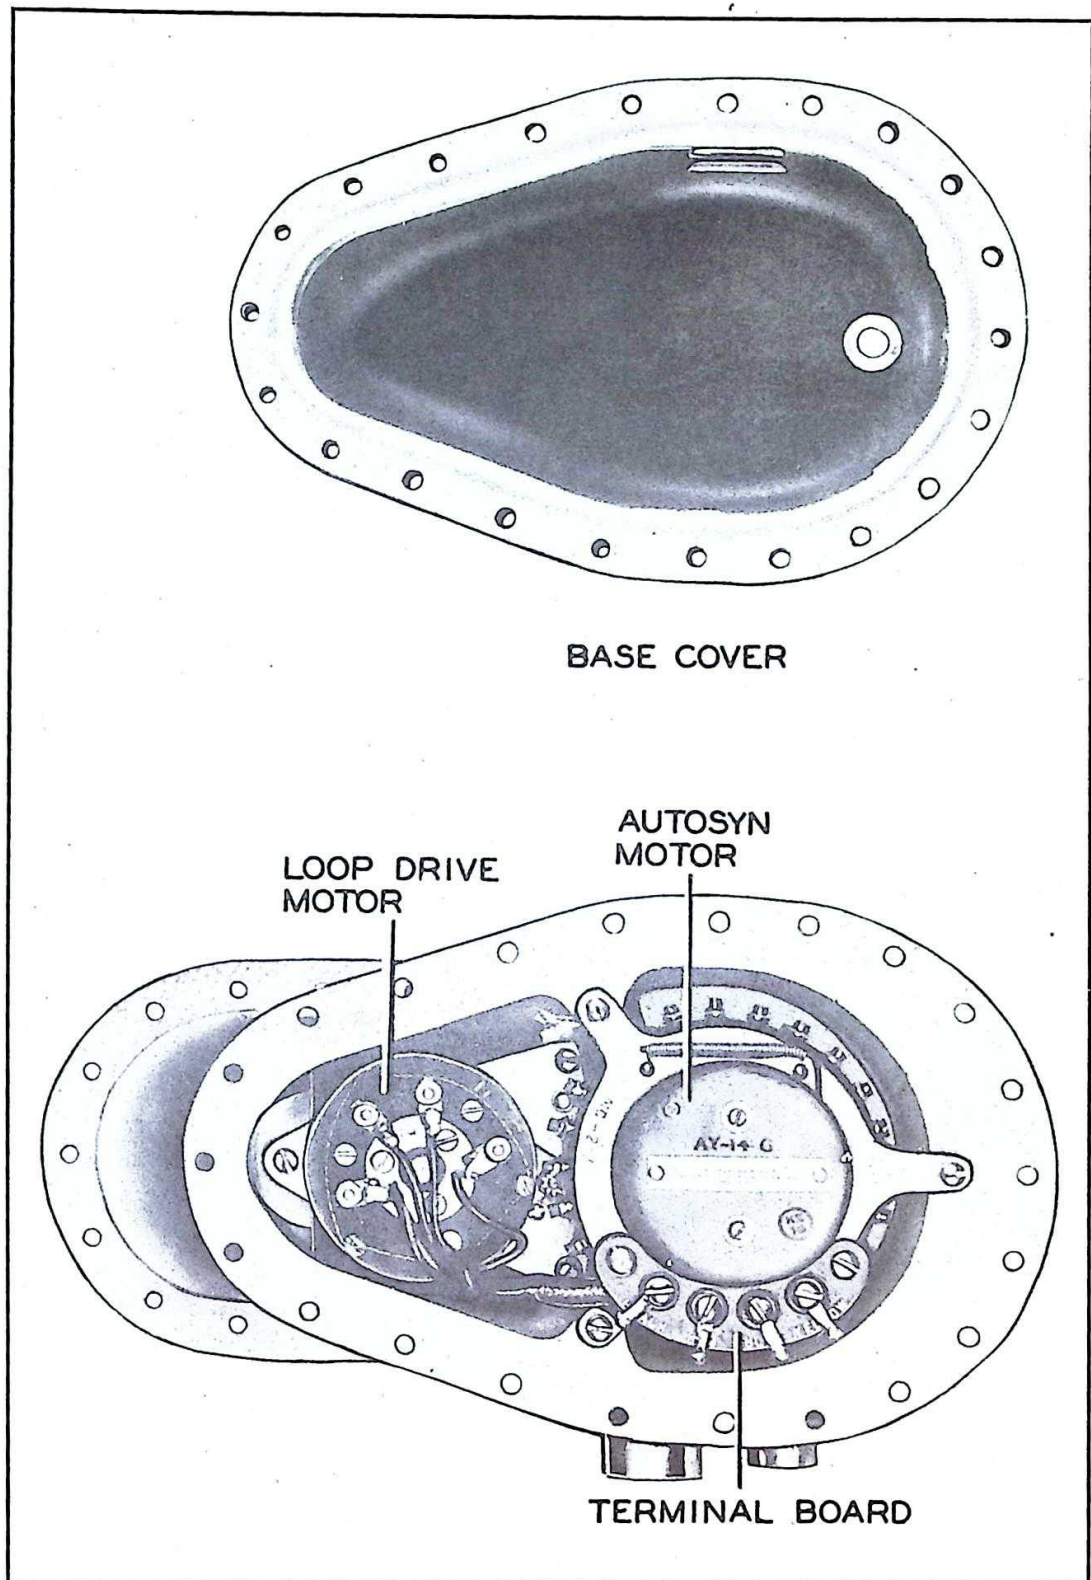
Loop LP-31-A—Bottom Plate Removed
